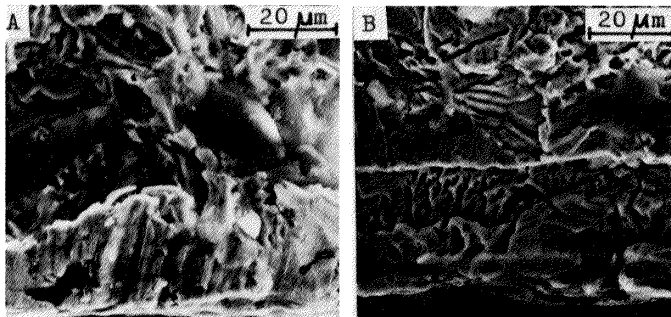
Scan electron fractographs near the crack initiation zone for 1Cr18Ni9Ti steel: (a) smooth; (b) smooth and peened
